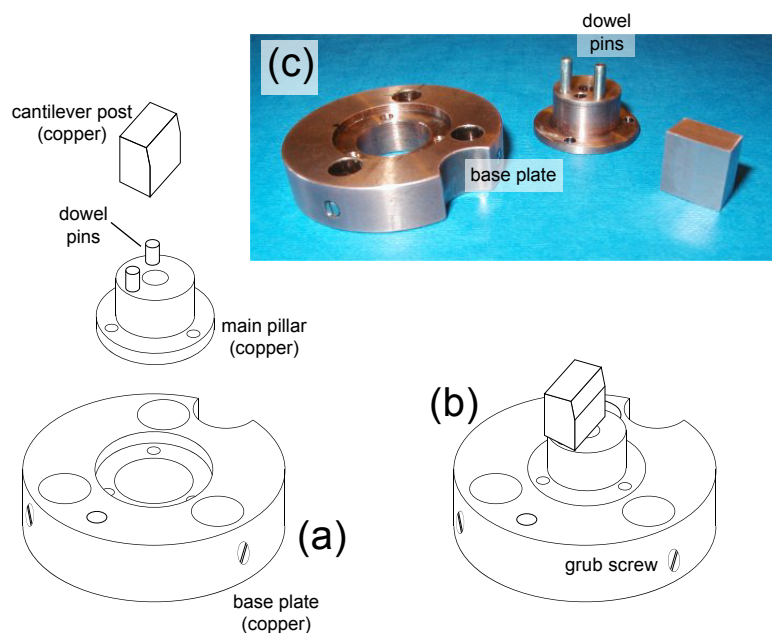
Design and construction of cantilever mount #2. (a) Exploded diagram showing the three parts of the mount. (b) How the three parts fit together. (c) The machined pieces of the mount.
